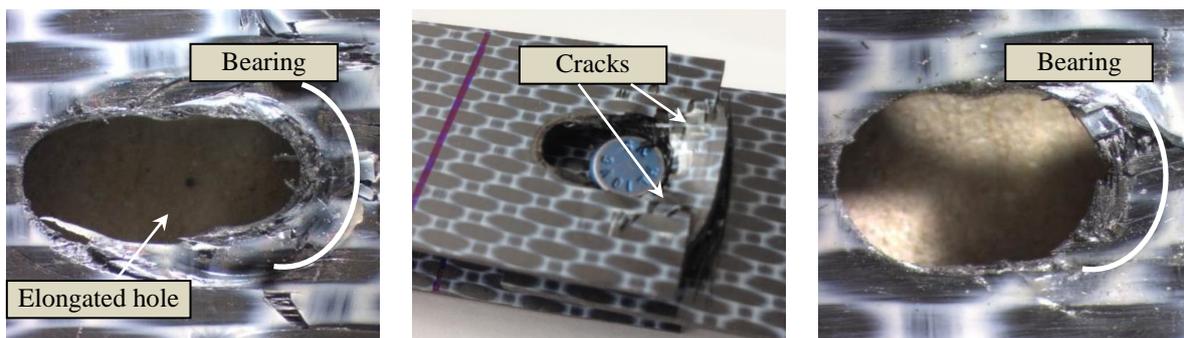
Fracture surface of the mechanically fastened joint after DLS tests (middle). The left and right images show the damaged area and elongated hole of outer and inner substrate after removing the Hi-LokTM fastener, respectively.
